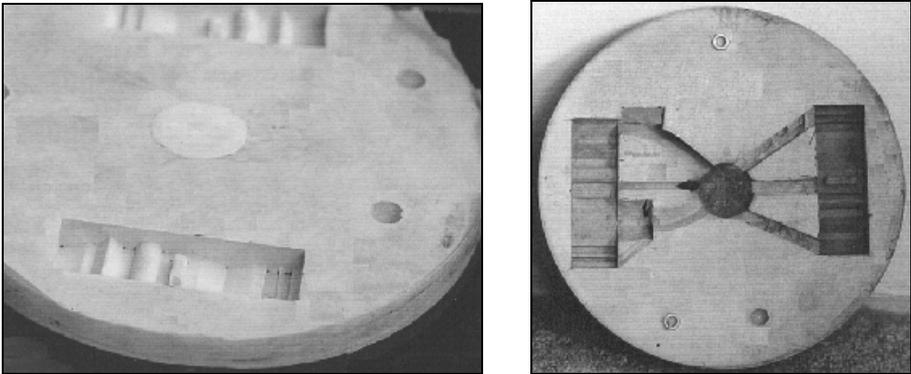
Bottom halves of the spin casting rubber moulds (without and with runners).
